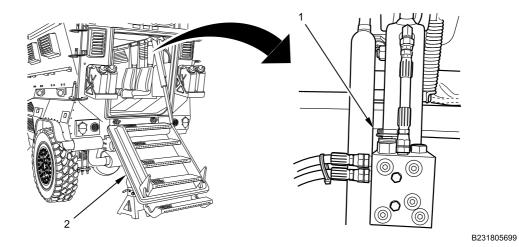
Rear Door/Ramp Lowered and Supported with Jackstand.
